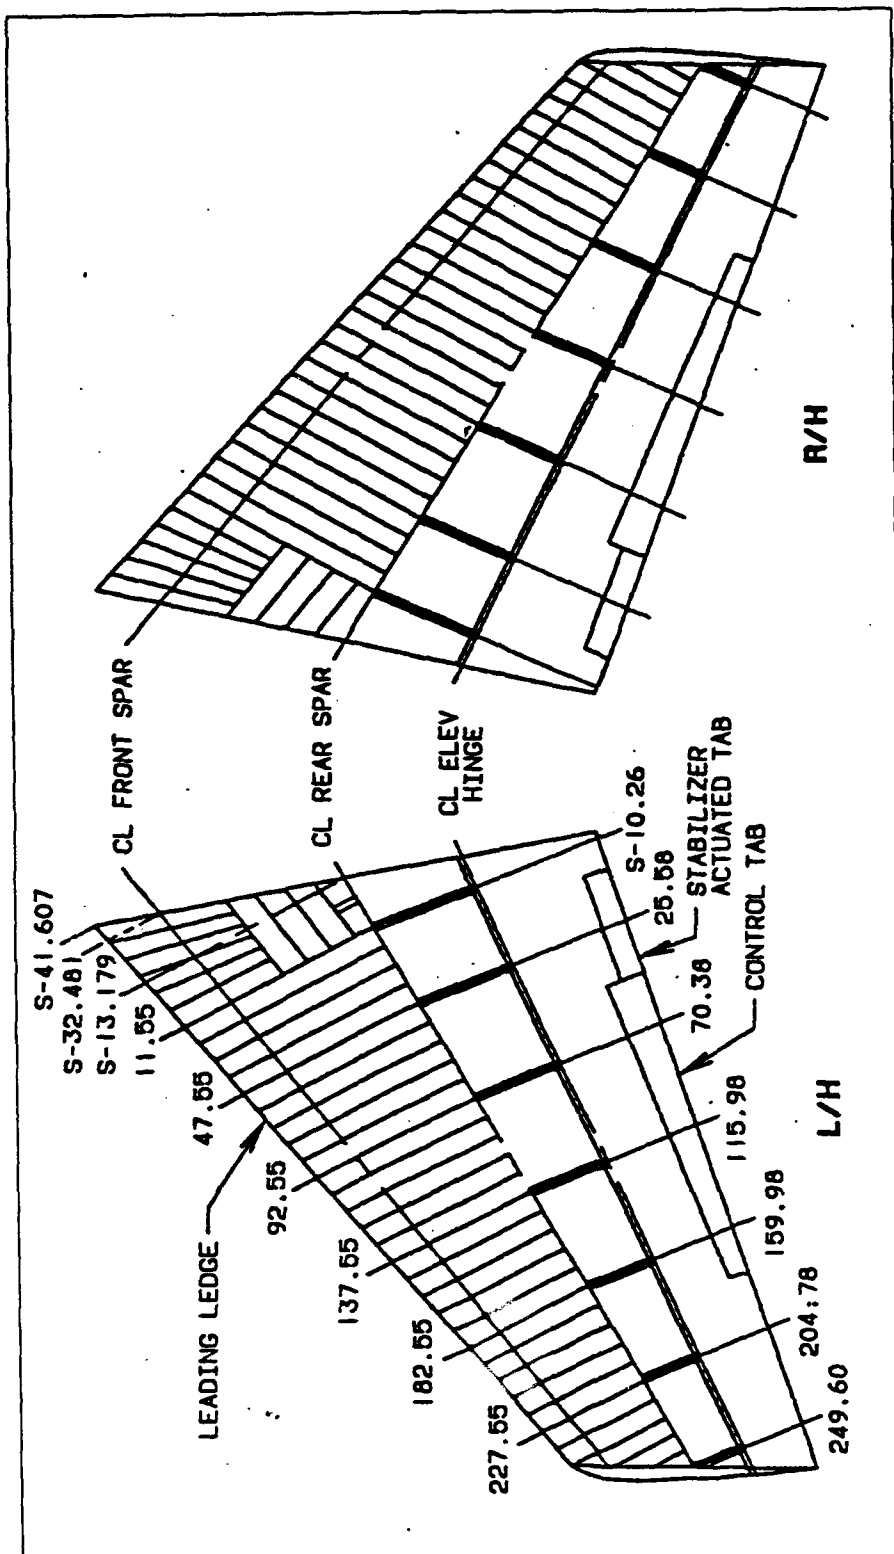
Horizontal Stabilizer And Elevator Structure, Centerline - View Looking Down
